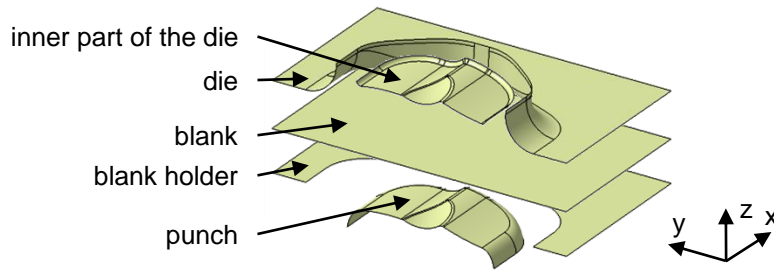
Surfaces of the deep drawing tool and blank for the finite element model
